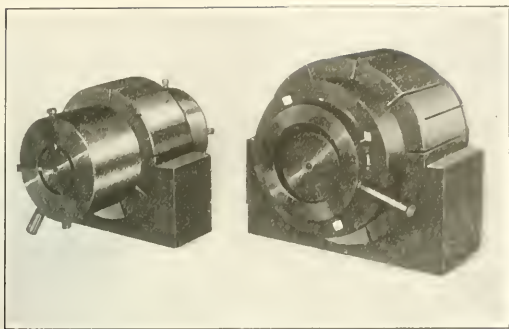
Expanding Arbor with Adjustable Center for turning Eccentric Bushings
